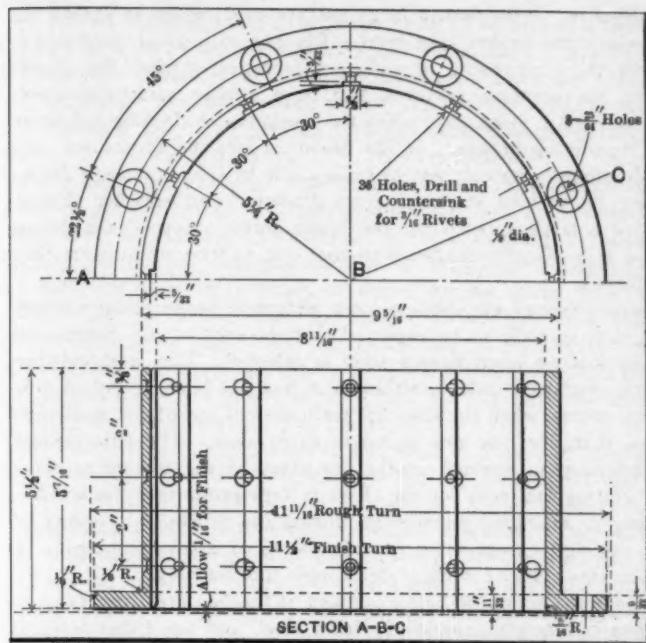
Packard clutch casing of drawn steel housing the 1910 type of dry disc clutch
